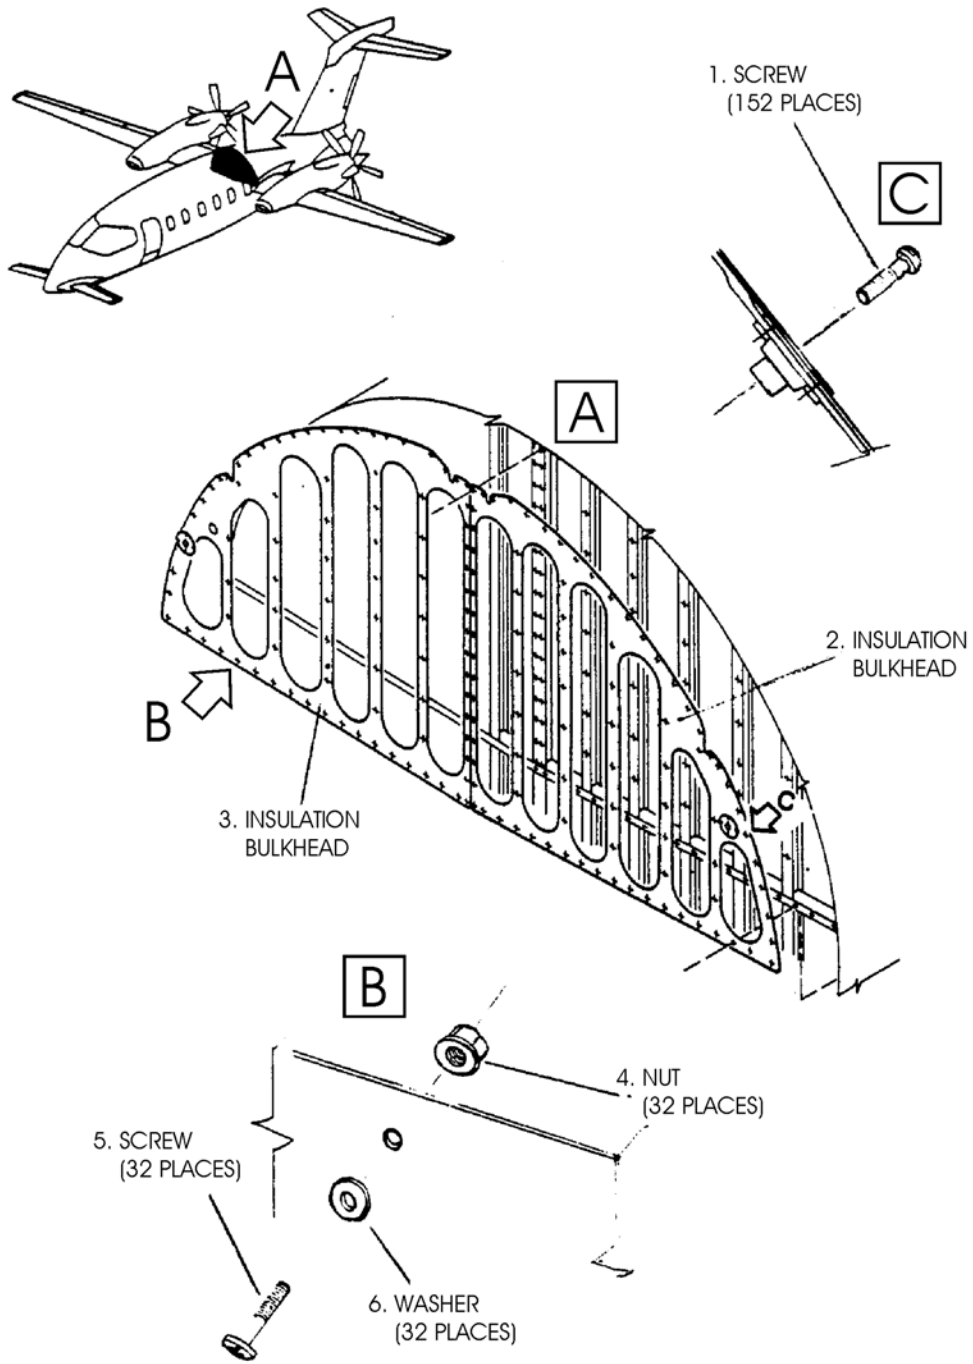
Insulation Bulkhead - Removal/Installation (Sheet 1 of 2)
